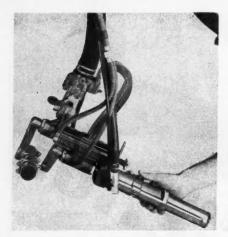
The new Progressive low-pressure welding gun for light gauge alloys is available complete with transformer, controls, etc., as to portable unit.
